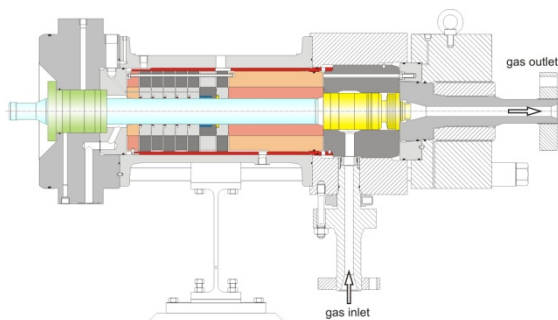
Hyper compressor Cylinder. Highlighted parts have been replaced or machined.
